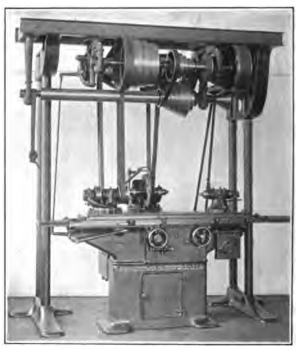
Universal grinding machine with direct-motor drive. (Courtesy Brown & Sharpe Mfg. Co.)
